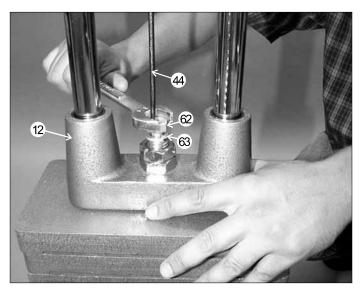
Attach the Lat Cable (#44) to the Top Plate/ Selector Bar (#12) and secure it using one Split Bolt 1/2-13 X 1 (#62) and one Split Washer 1/2" (#63). Use Fig. E on page 16 for further illustration of this assembly. *Note: Be sure this hardware assembly is securely fastened.
